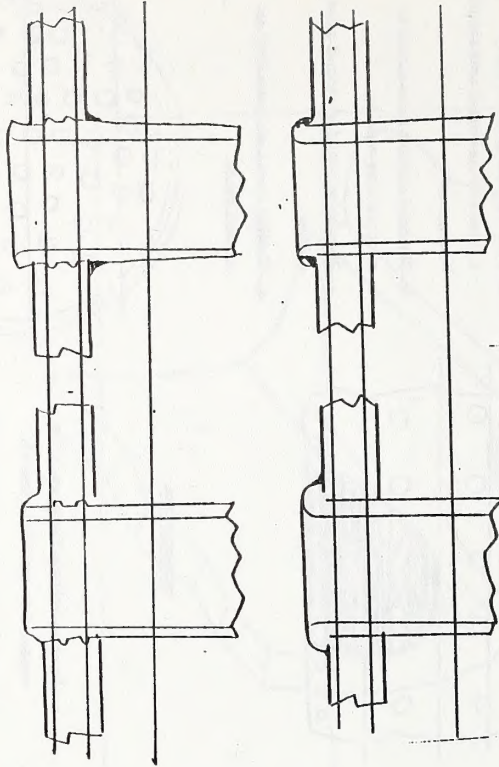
TYPICAL EXAMPLES OF SEAL WELDING TUBES (Repealed)
